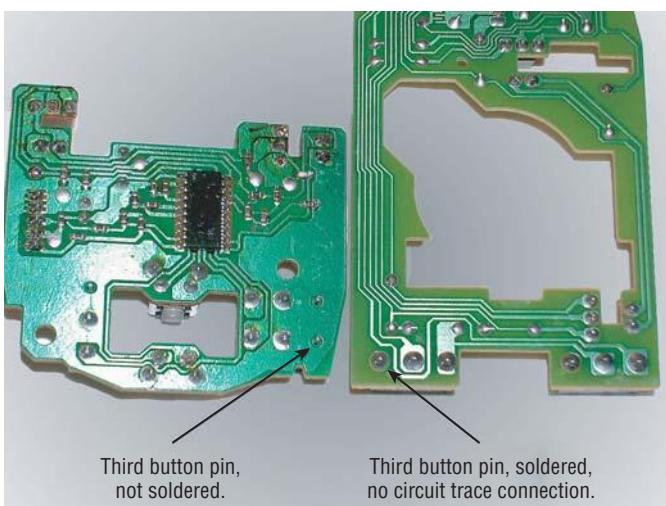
The mouse board on the left shows the third pin on the buttons, unsoldered. The board on the right shows that the traces do not connect.
